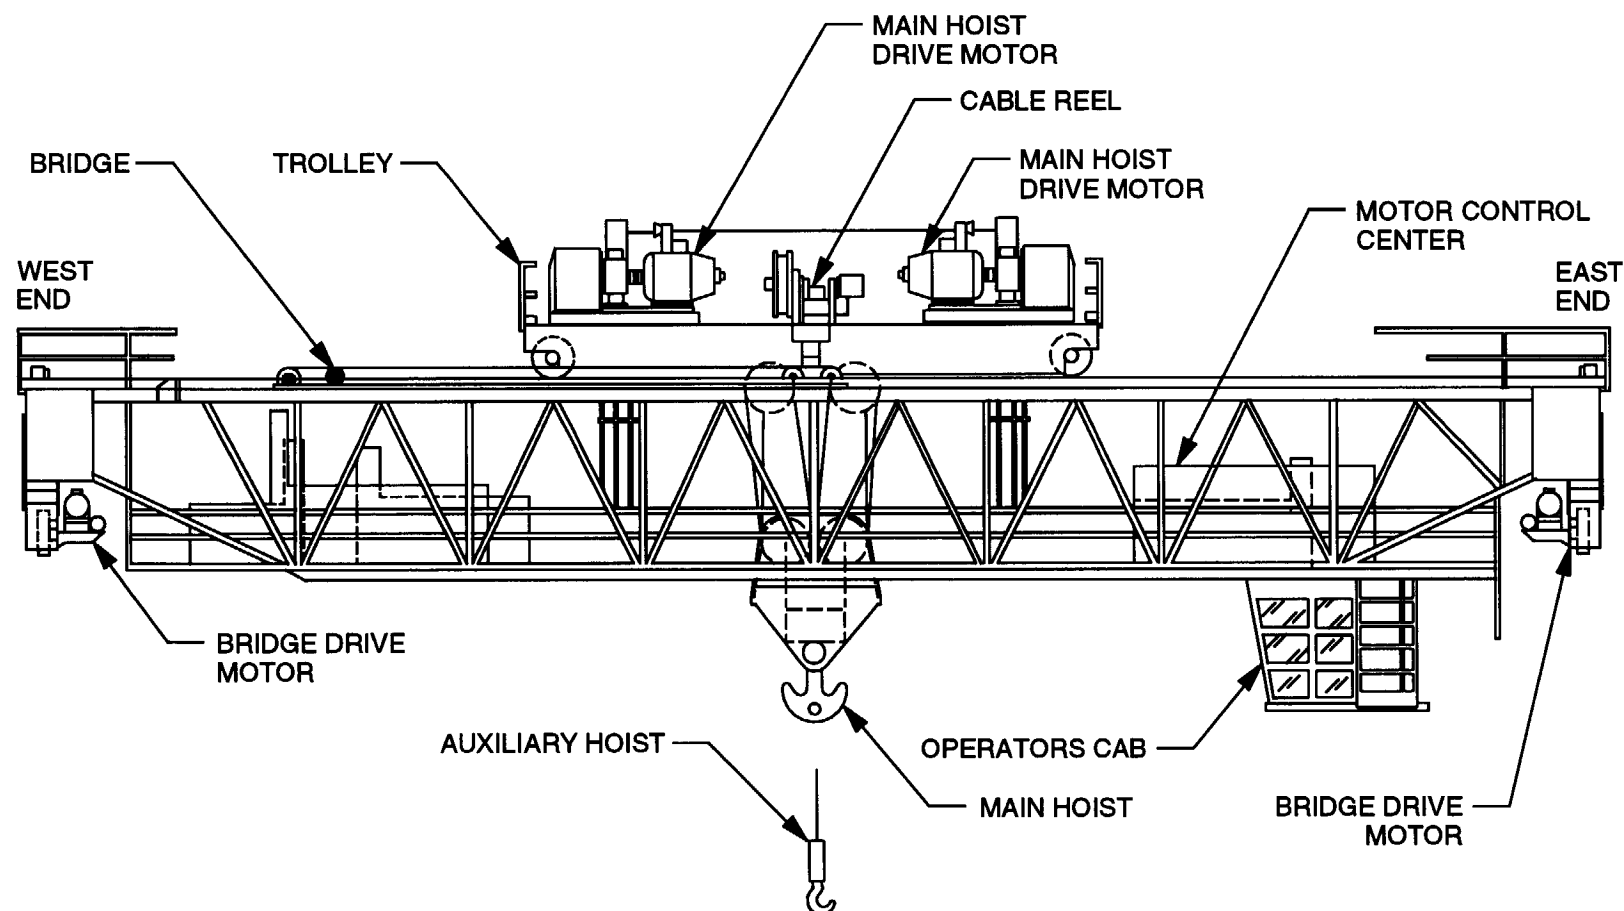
VAB 175-TON BRIDGE CRANE, ELEVATION VIEW
